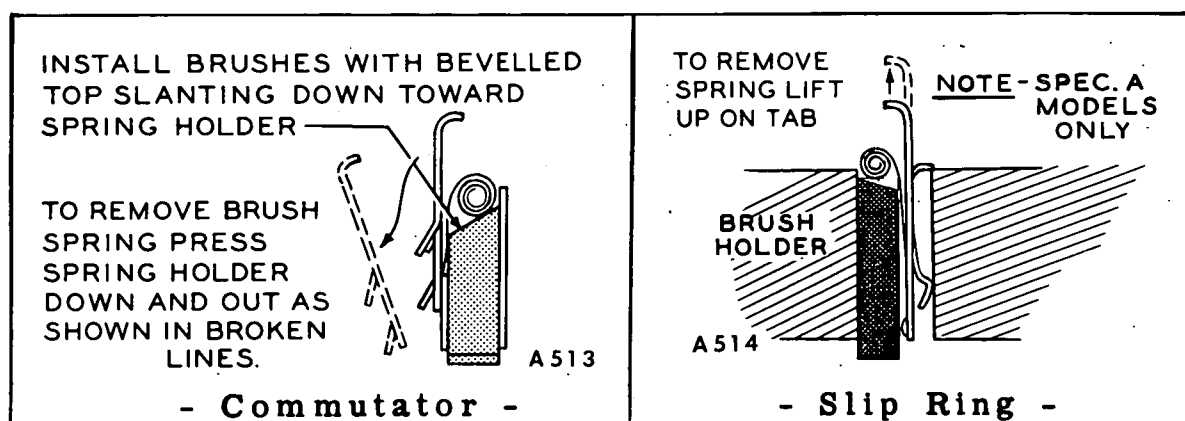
BRUSHES AND SPRINGS (Constant Pressure Type)
